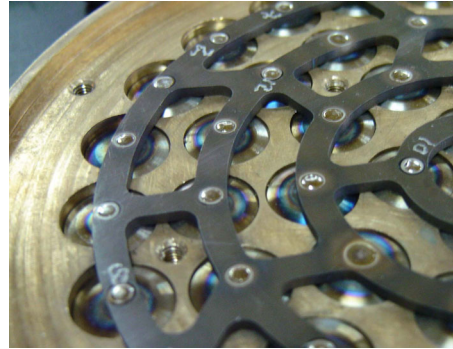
1ST CARA END PLATE WELDING PROTOTYPE.
